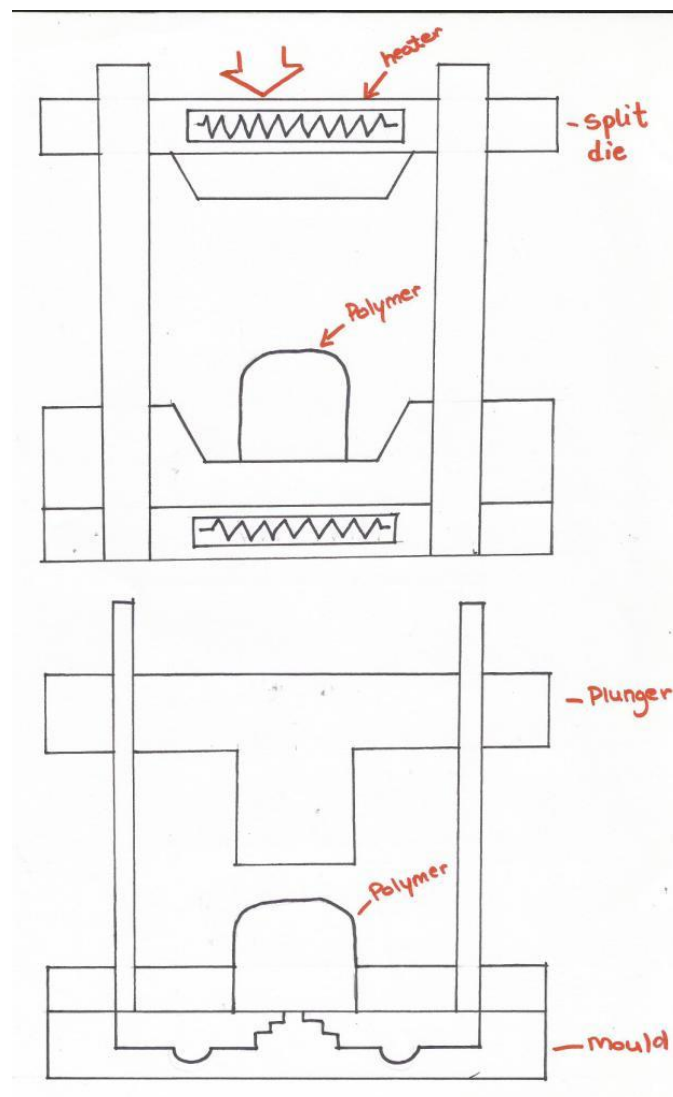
Compression moulding (above) & Transfer moulding (below).
